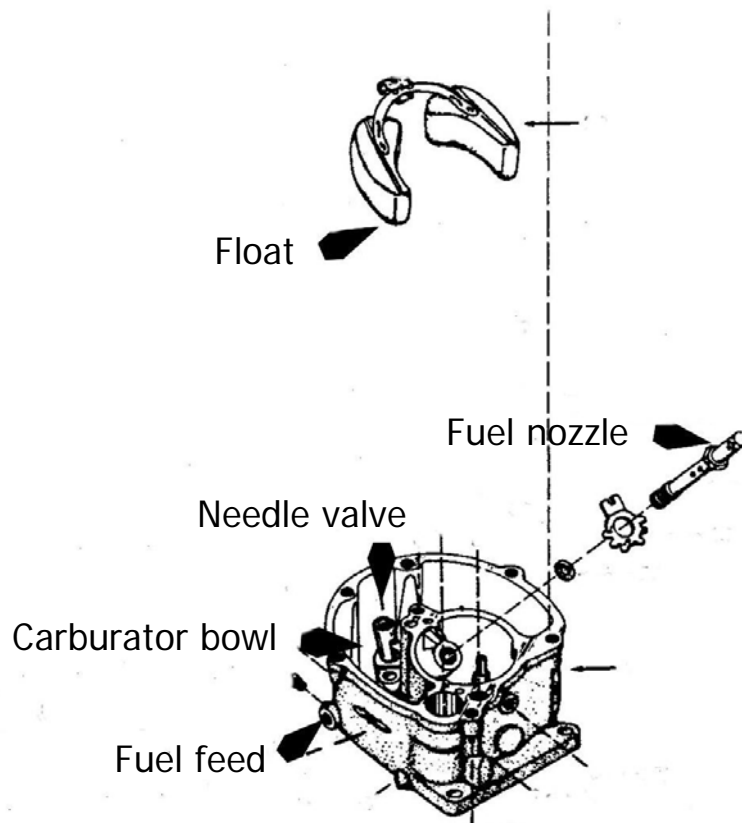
Partial view of the Marvel Schebler/Precision Airmotive carburettor
